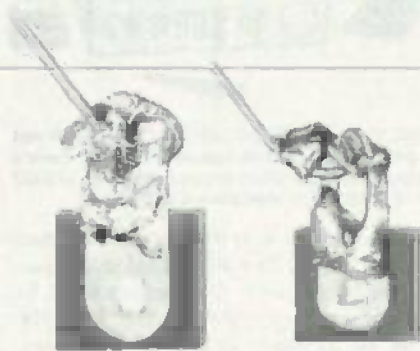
A COLD SOLDER JOINT may resemble a or b. One is as bad as the other.
